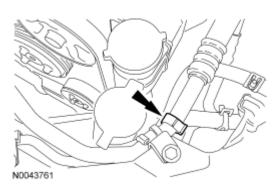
Locating A/C Tubes Nuts Courtesy of FORD MOTOR CO.
